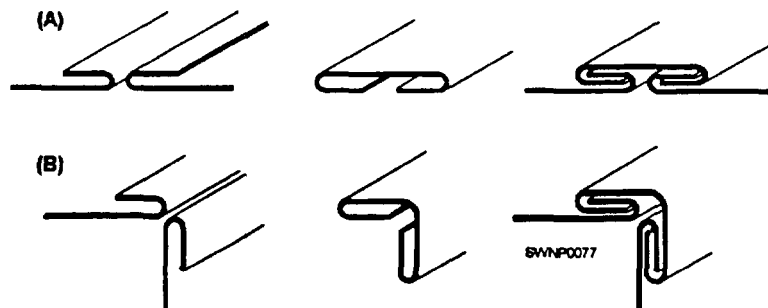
(A) Cap strip seam, (B) Locked corner seam
